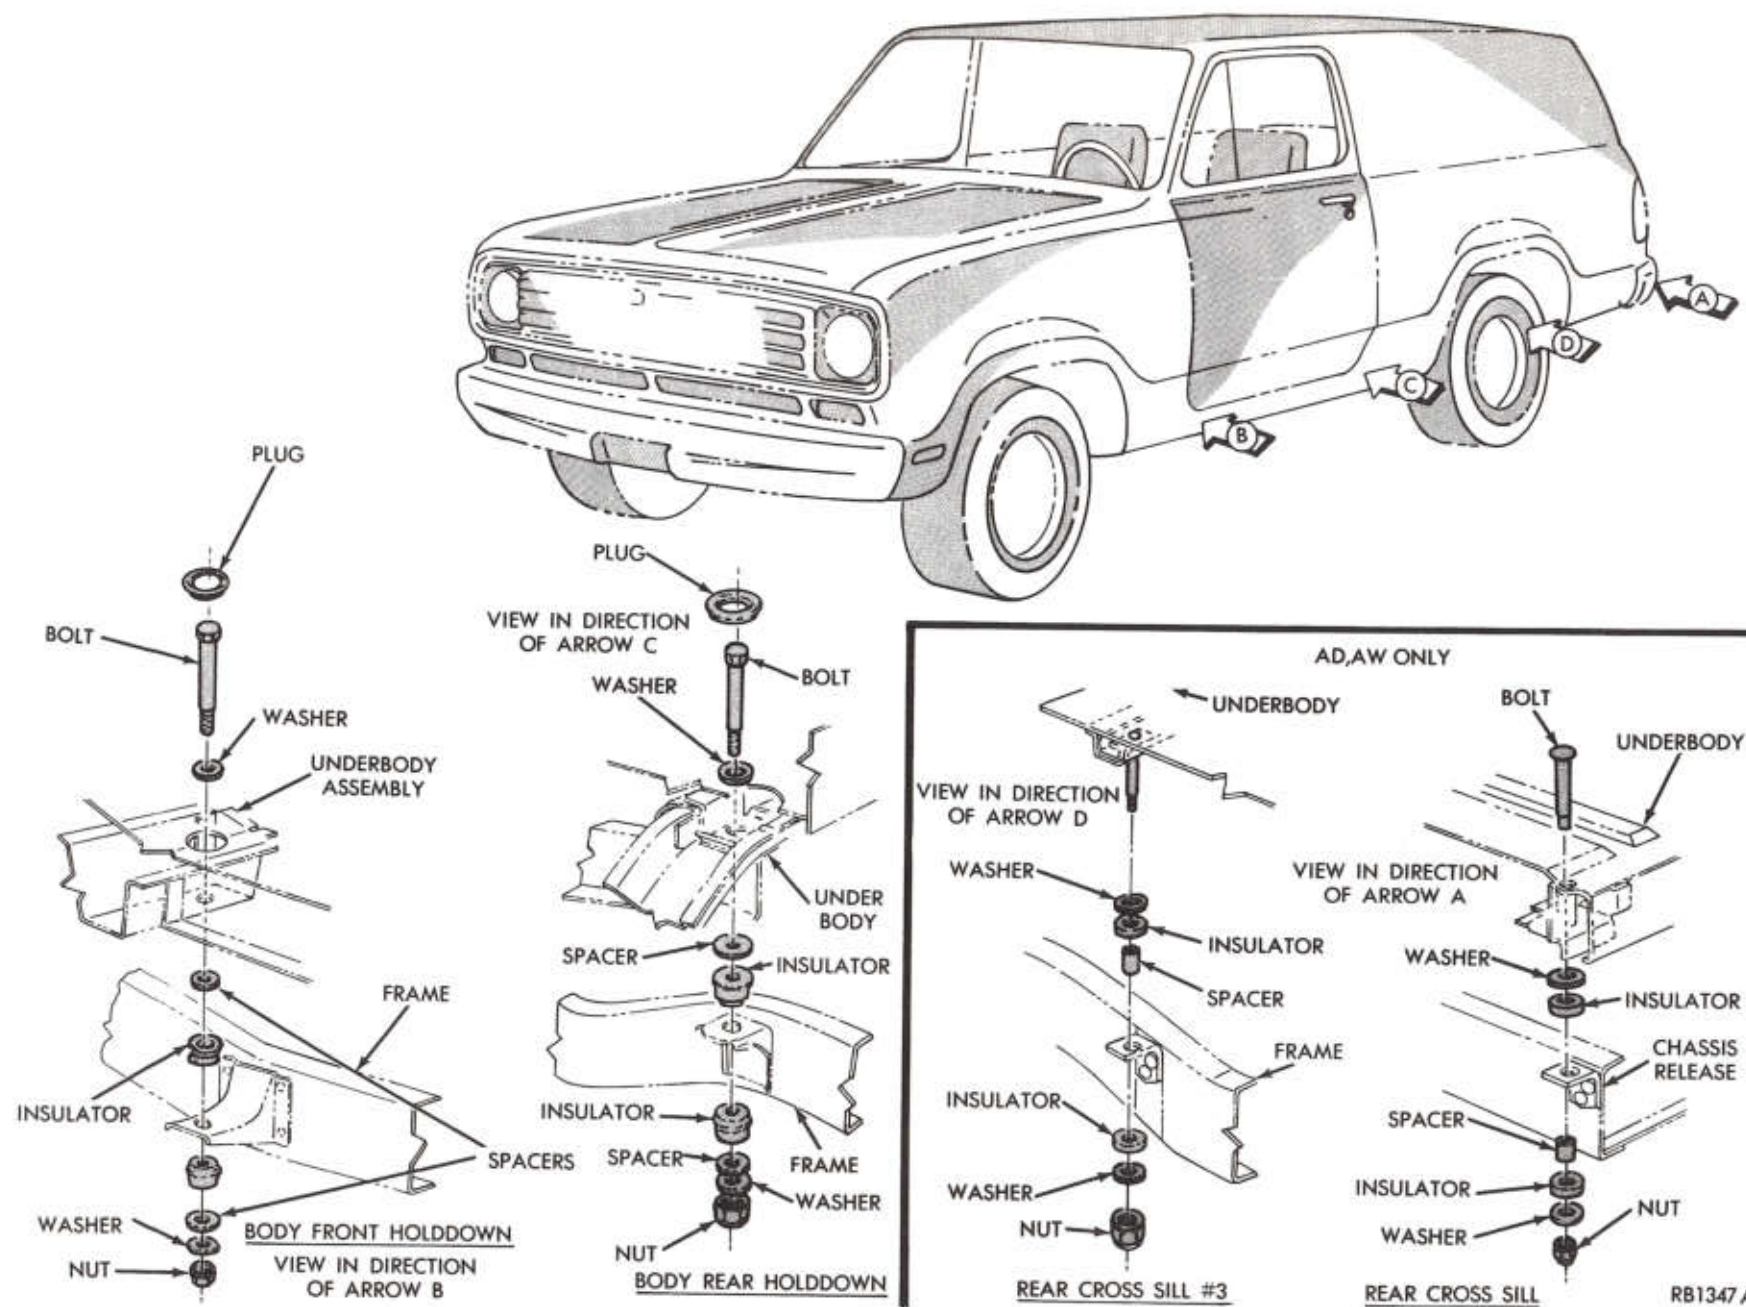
Body Hold-Down Mounting AD, AW, D, W
